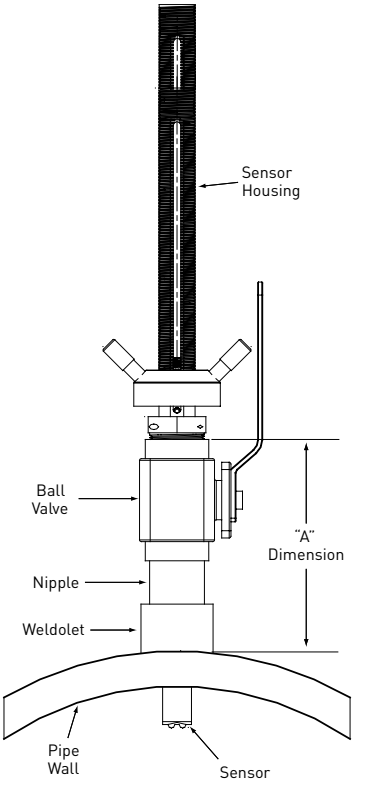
Hot-Tap installation with "A" dimension using a ball valve, short nipple and weldolet (threadolet)
